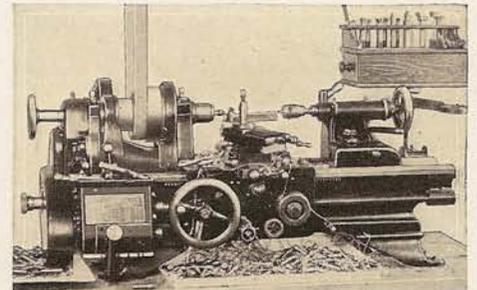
Manufacturing Small Duplicate Parts on a 9-inch Quick Change Gear Bench Lathe
